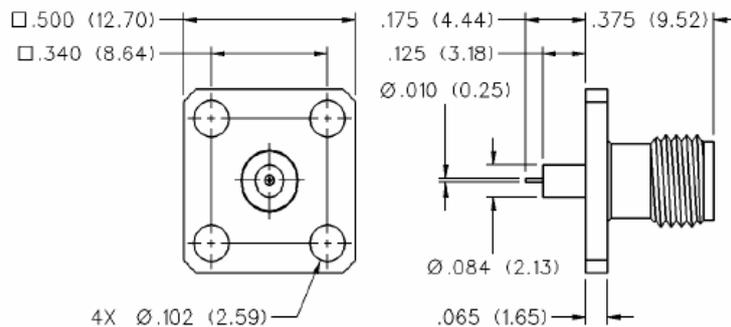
The dimensions and geometry of the selected SMA connector. [13]
